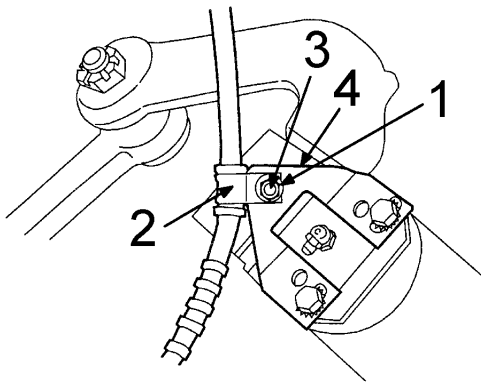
Install Brake Line Retaining Clip and Install Hex Nut and Flat Washer
